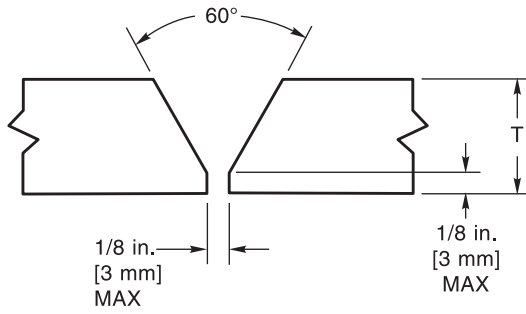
A—Pipe Test Butt Joint without Backing—Welder Qualification
